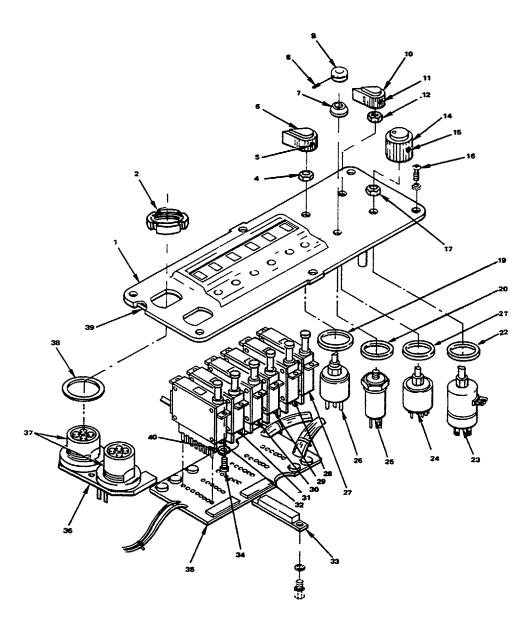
Control Panel A1A4 Component Location (Sheet 1 of 2)
